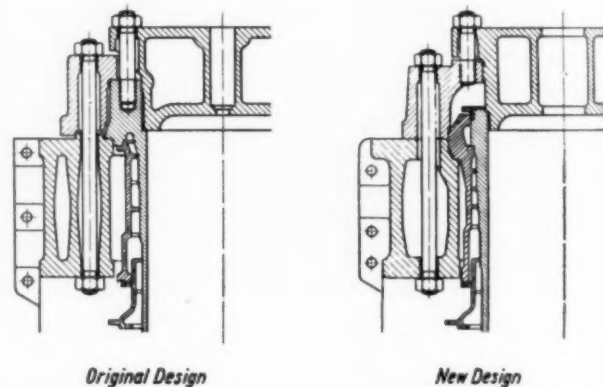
CYLINDER COVER, LINER, AND COOLING-WATER JACKET, A.E.G.-HESSELMAN DIESEL ENGINE
